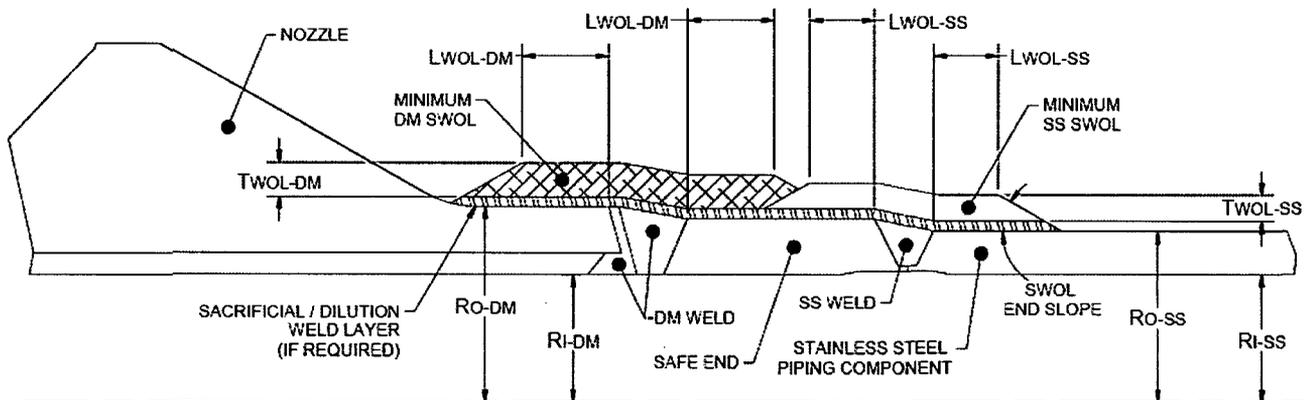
Weld Overlay Design Parameters for the RCS Spray Nozzle
